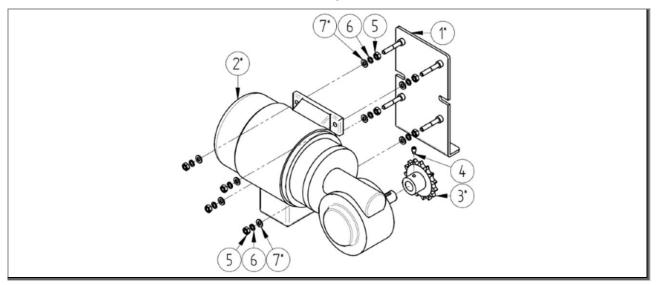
Parts list: External drive unit - motor unit - position of drive unit 23 - T.900.0002.02
